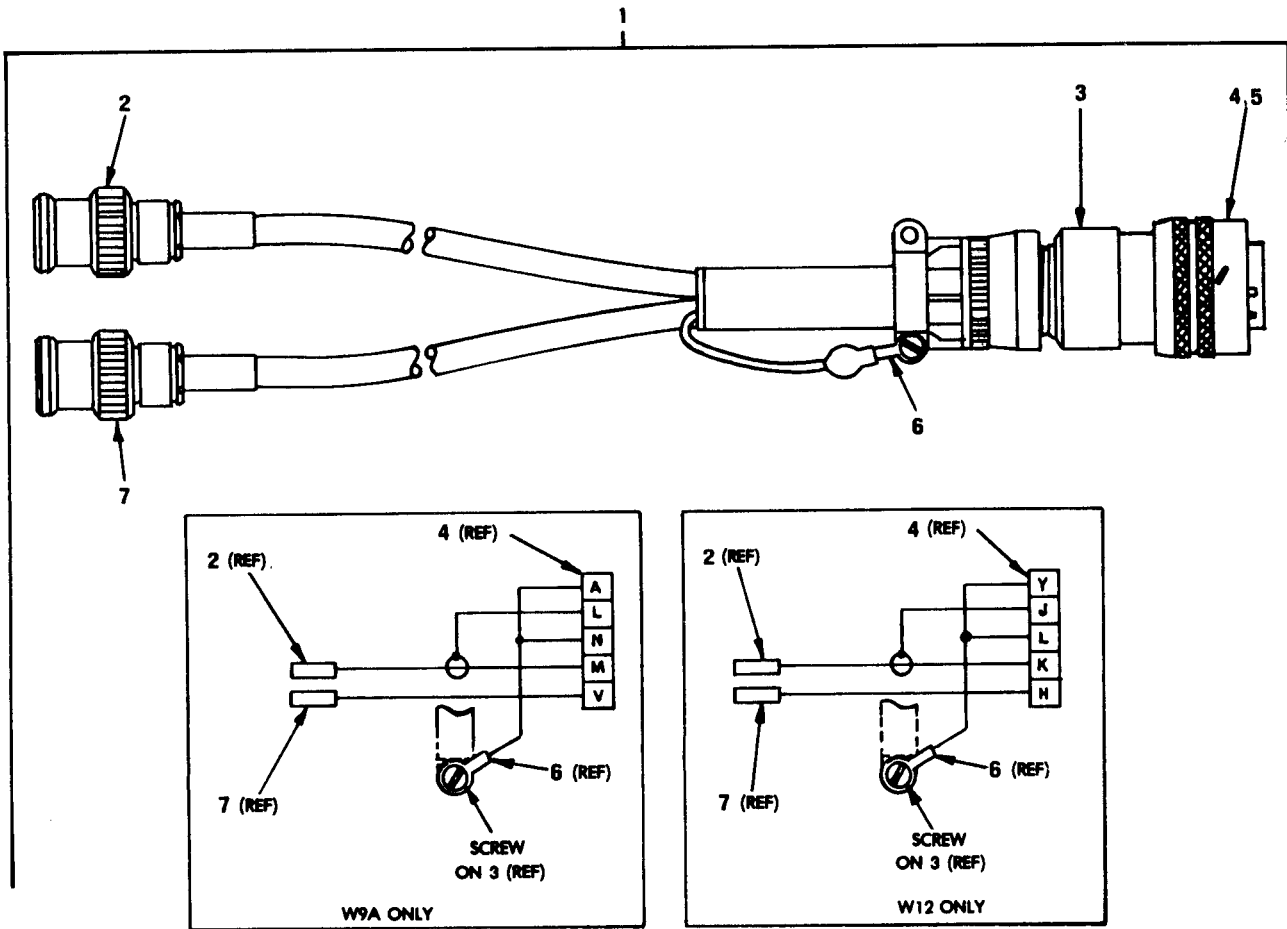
Adapter cable assembly W9A (467-115-001) and W12 (467-120-001)
